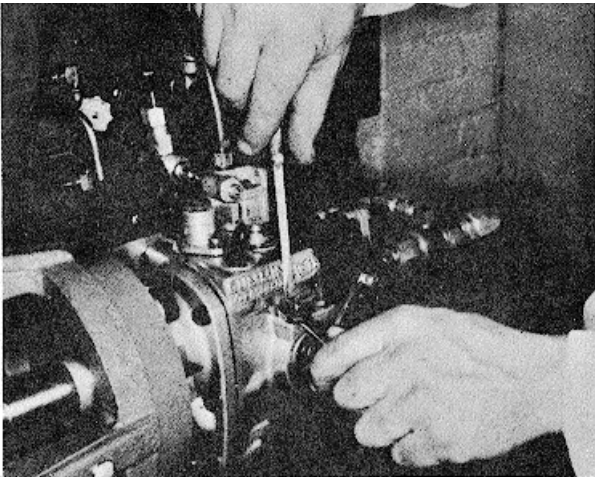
, F5112. Adjust throttle leakage rate
